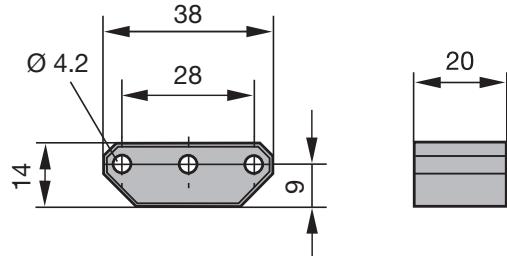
Installation dimensions of BTL5-P-3800-2 magnet
